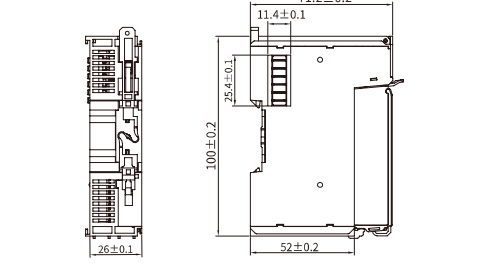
Installation dimension for HCQX-AD/DA04-D2 (Unit: mm)
